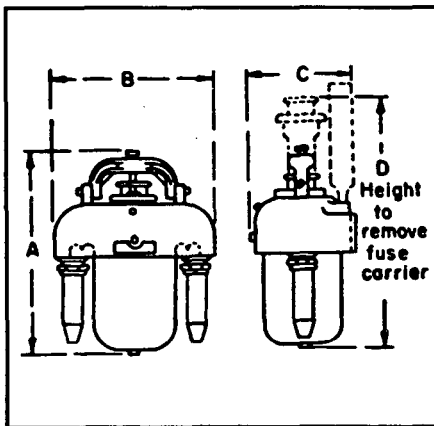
Sealed cutout with detachable wiping sleeve for lead-covered cable
